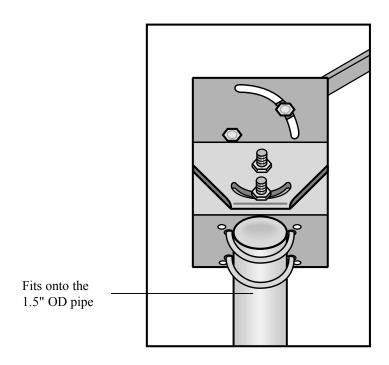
Antenna Mounting Hardware, Assembled View 2
